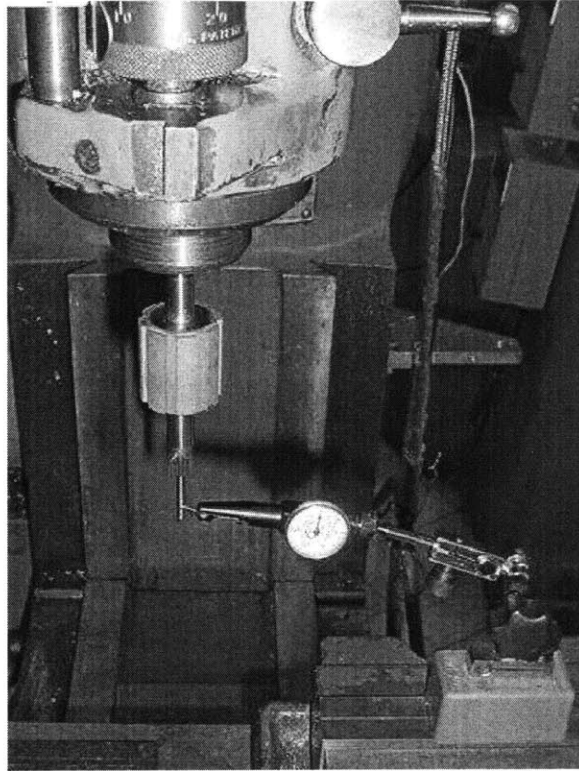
Typical setup used to measure shaft parallelism and concentricity.
